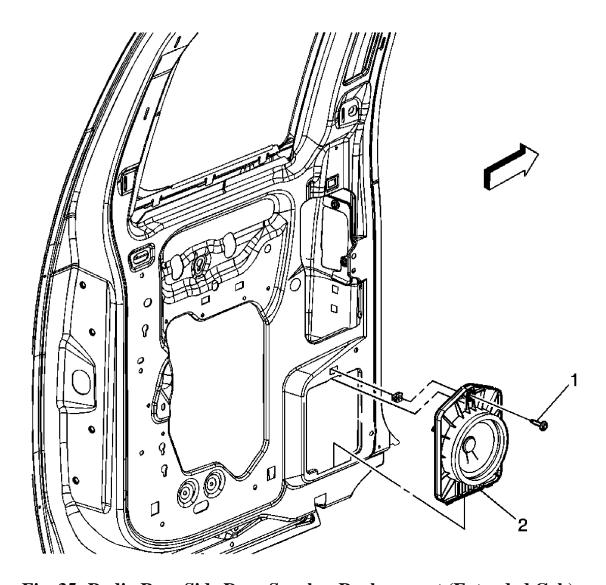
Radio Rear Side Door Speaker Replacement (Extended Cab) Courtesy of GENERAL MOTORS CORP.
